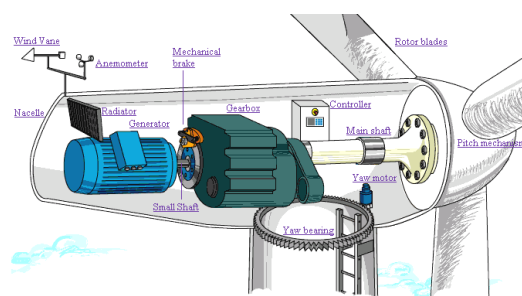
Typical layout of drive train components in a modern wind turbine, with a hub carrying three blades, a main low speed shaft, a step-up gearbox and a high speed connection shaft to the generator
